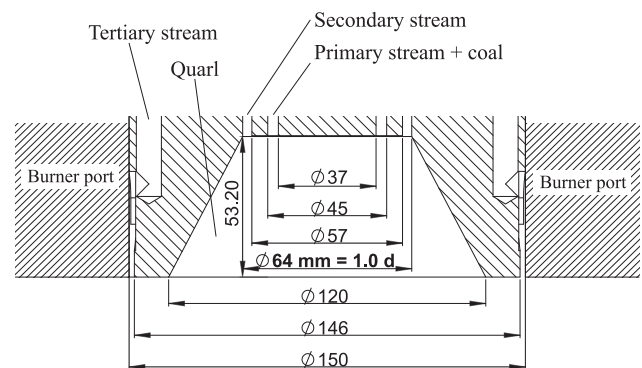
Cross-sectional view of swirl burner, all dimensions given in mm.
